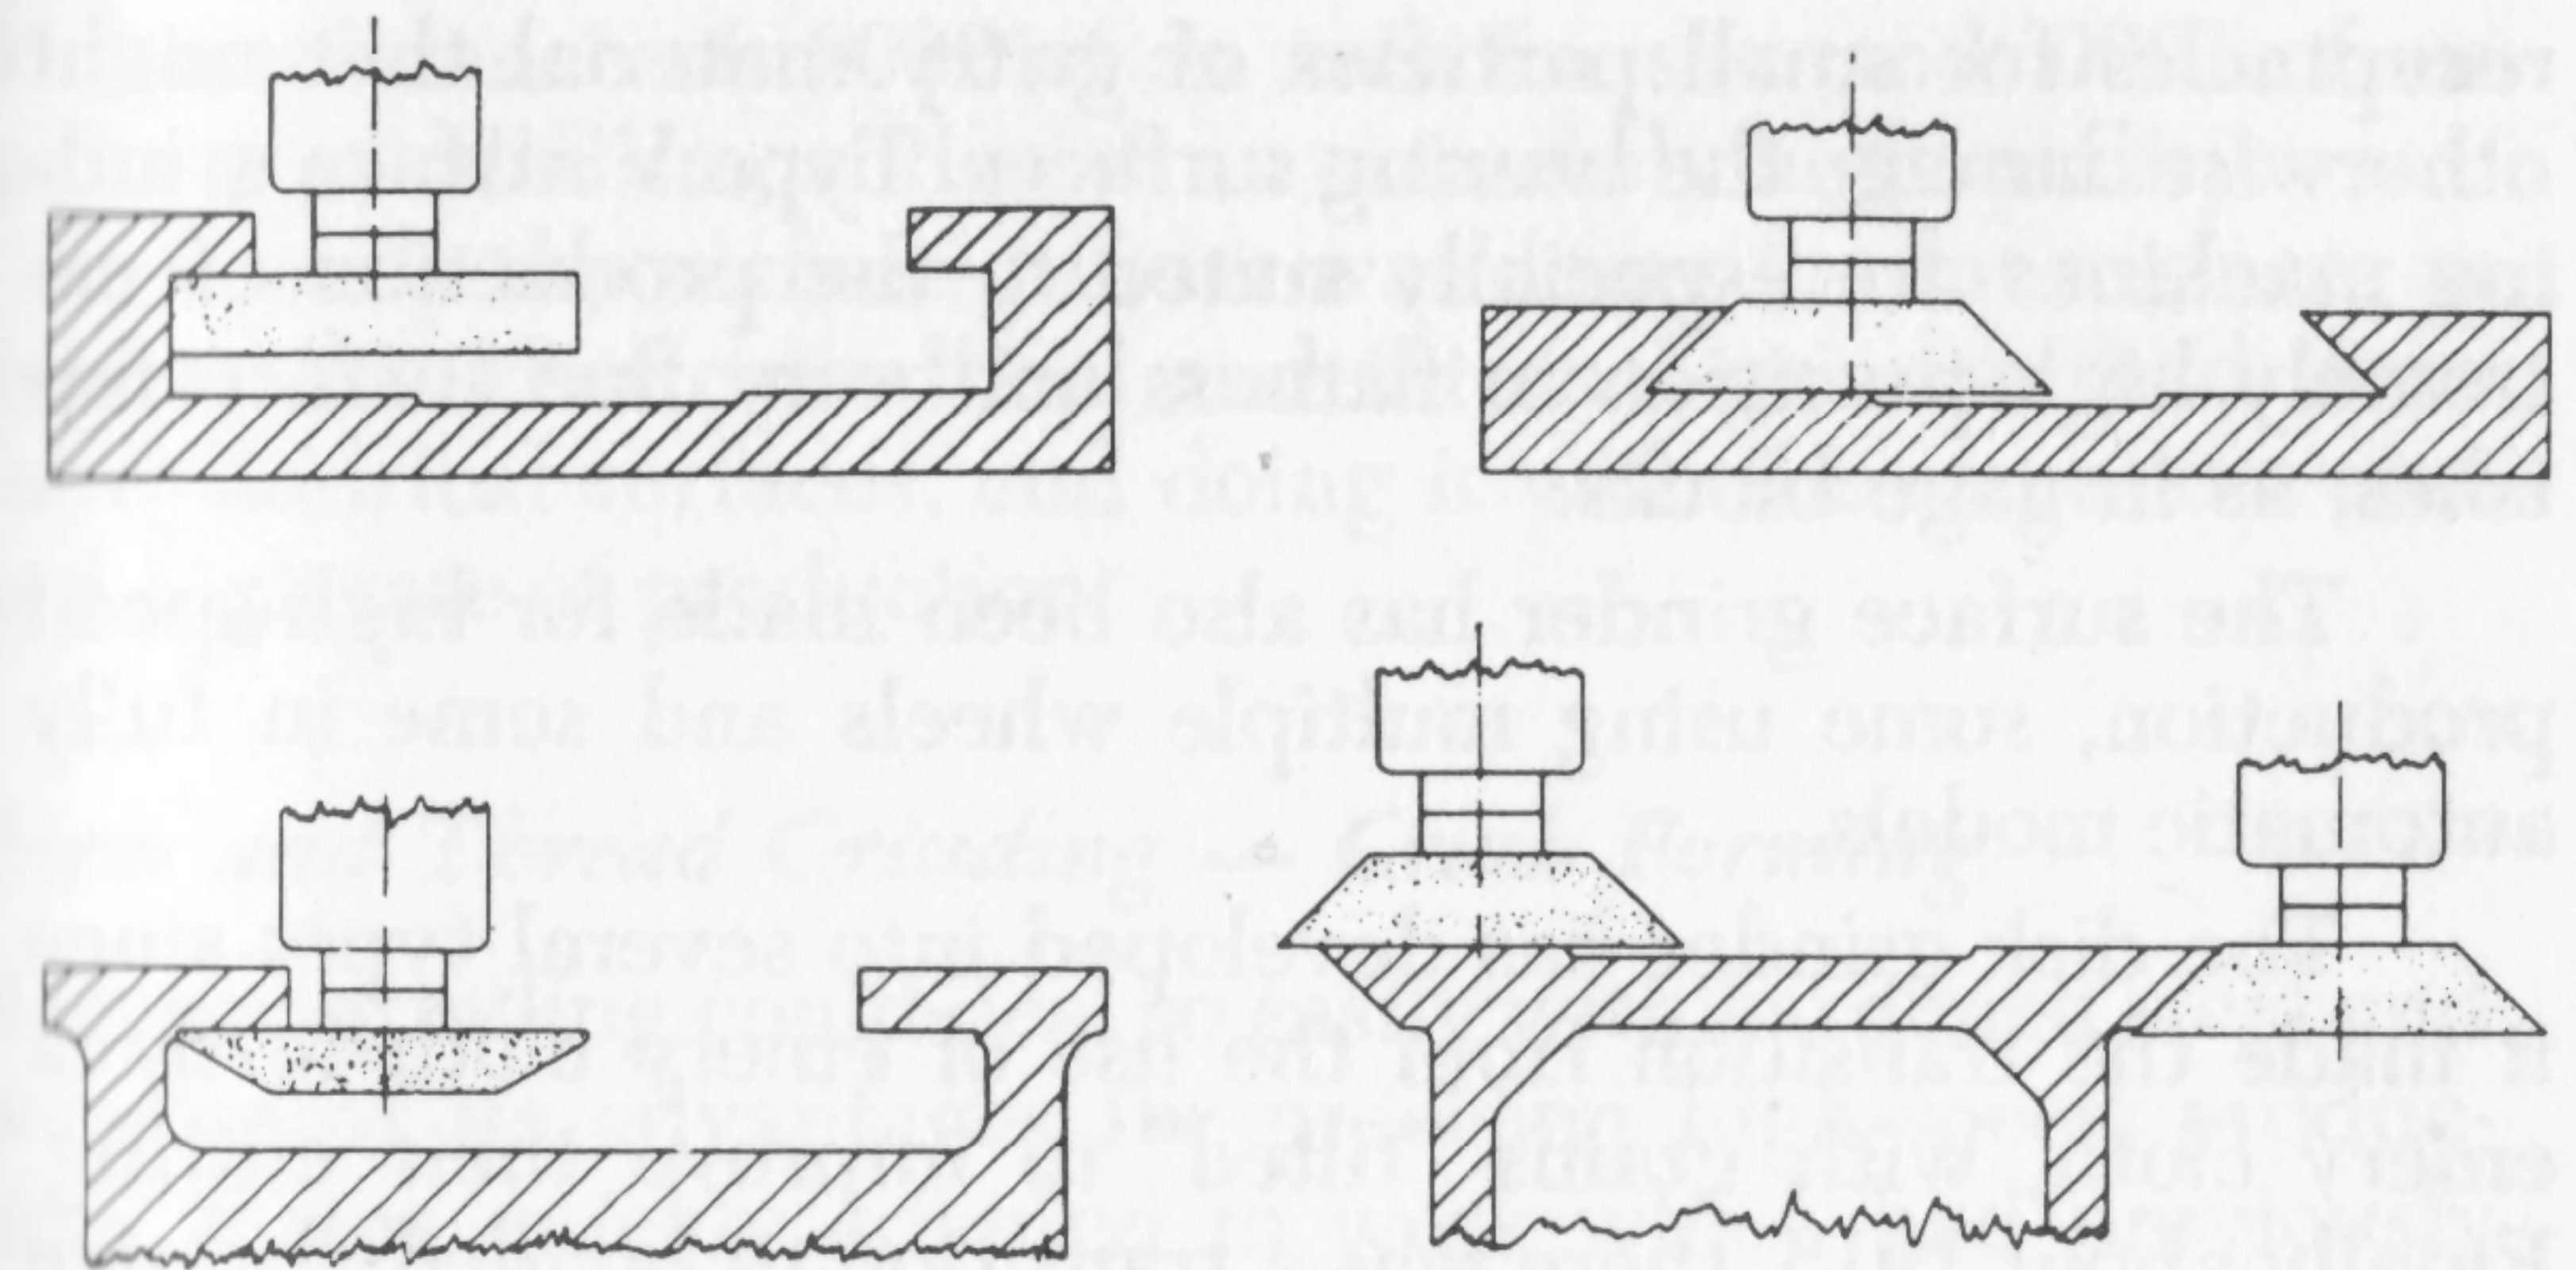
GRINDING WAYS AND SLOTS OF MACHINE TOOLS ON A VERTICAL SPINDLE SURFACE GRINDER (Lewis)
